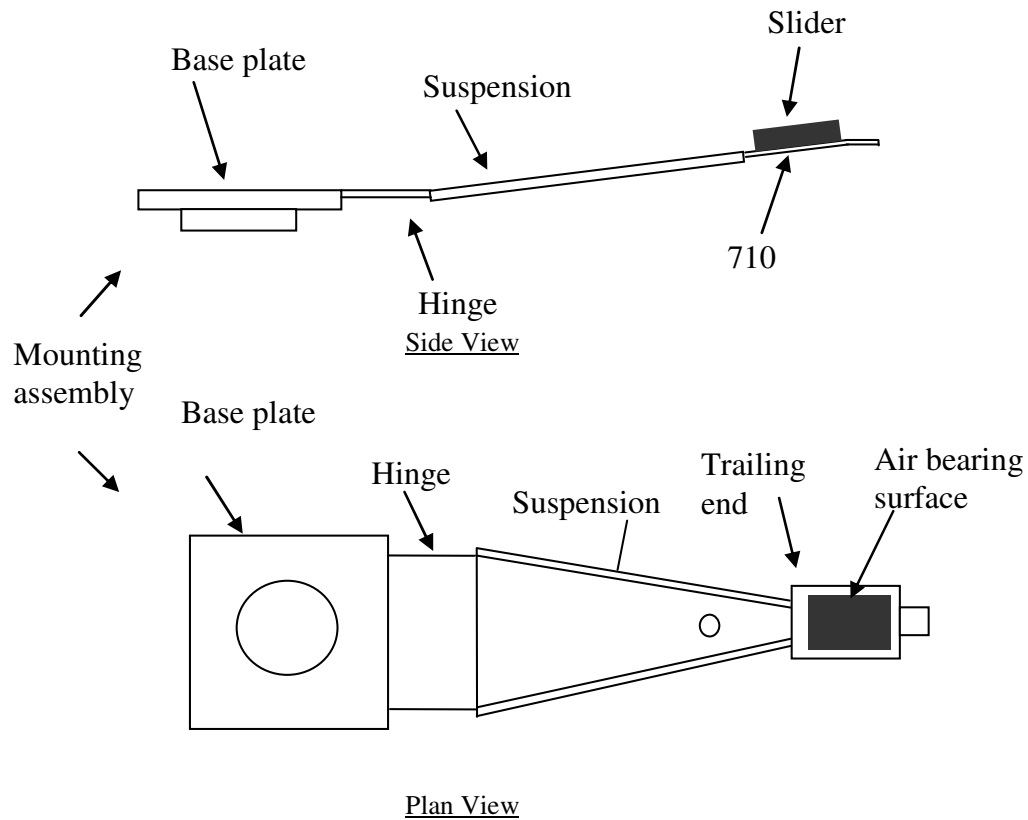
(a) and (b) show schematic side and top views respectively of a mounting assembly for a slider.
